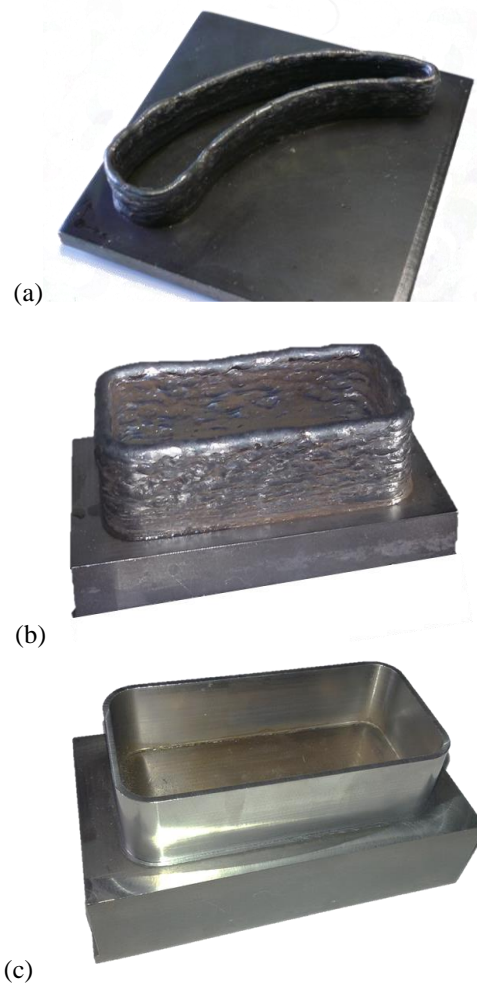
Examples of demonstrators manufactured by the implemented machine: blade-like part (a); box-like part after the deposition (b); box-like part after milling finish.
